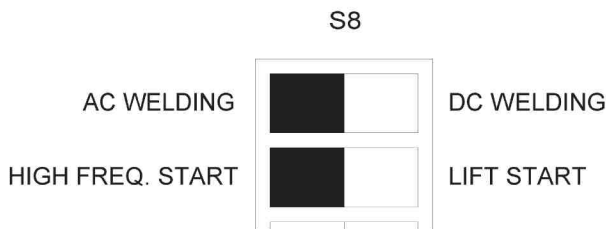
HF START MODE AND AC WELDING
